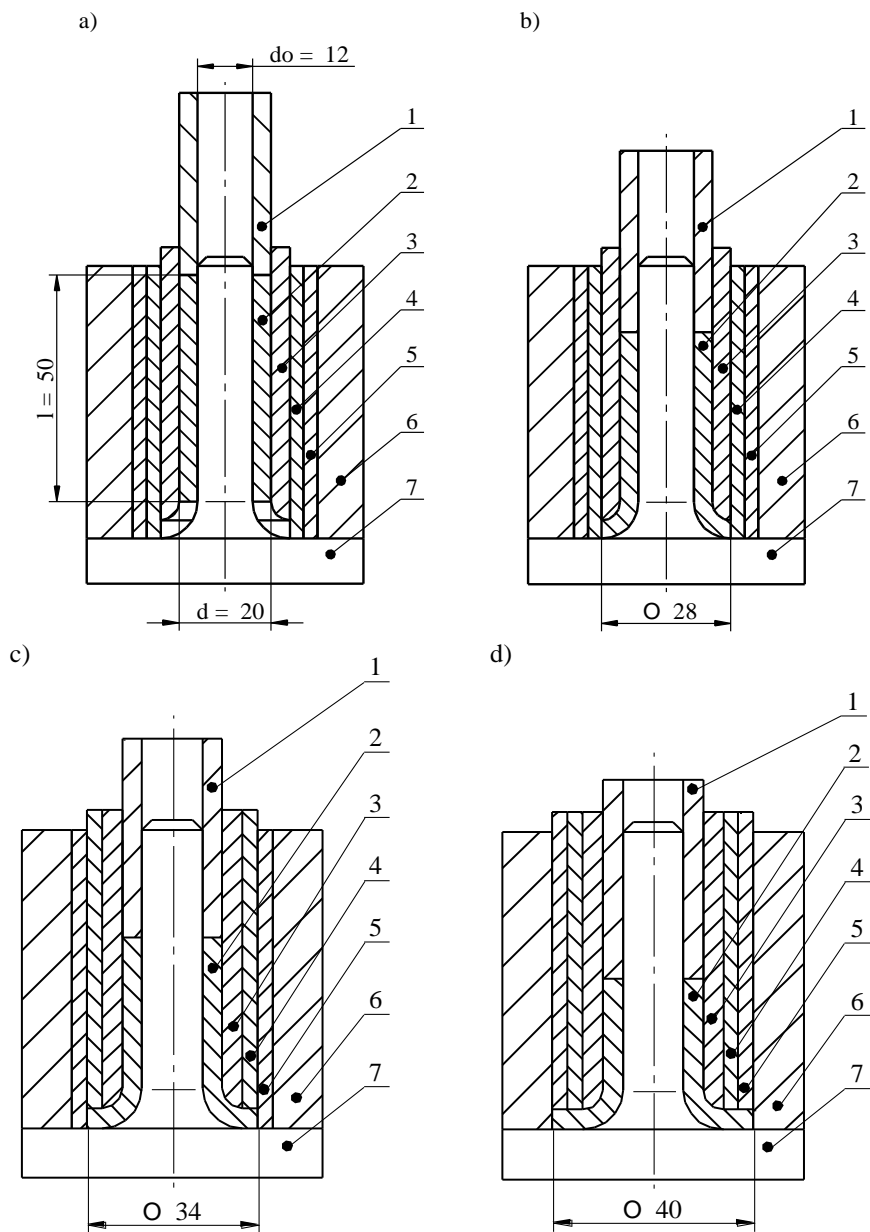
Design of the flanging process, where: 1 – punch, 2 – workpiece, 3 – internal sleeve, 4 – first movable sleeve, 5 – second movable sleeve, 6 – external sleeve, 7 – mandrel, a) initial stage of flanging, b) first stage of flanging, c) second stage of flanging, d) third stage of flanging [source: own study]
